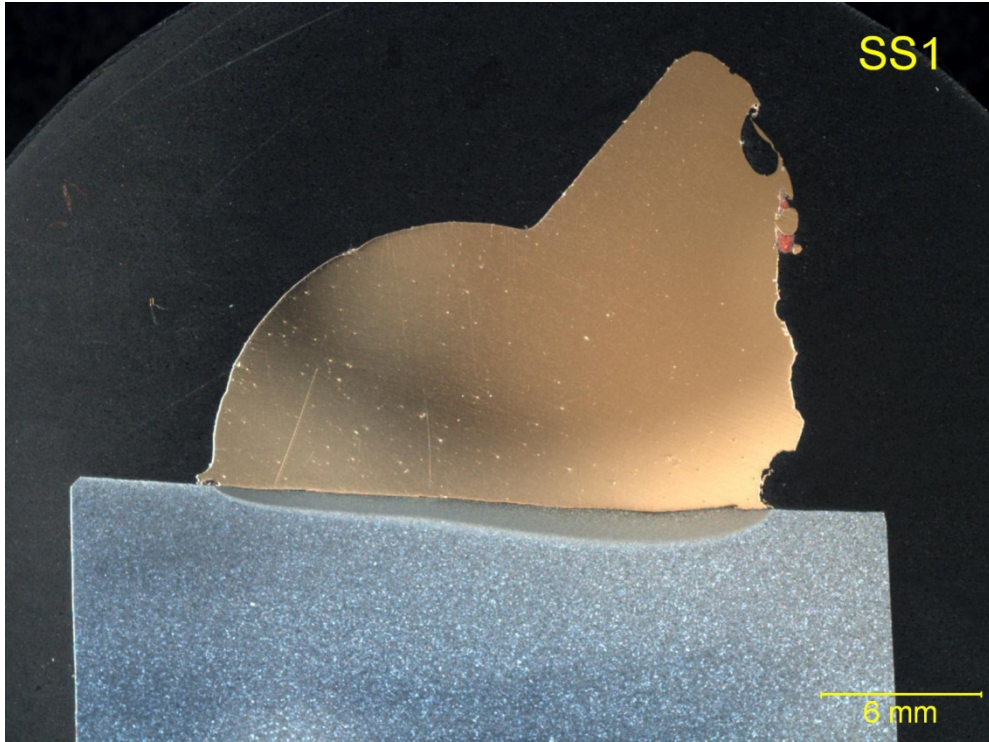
CAD Weld Joint Standard Chemistry Rail #1
